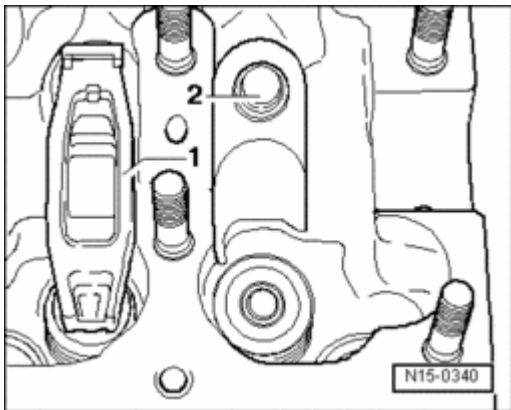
Identifying Roller Rocker Fingers & Supporting Elements
